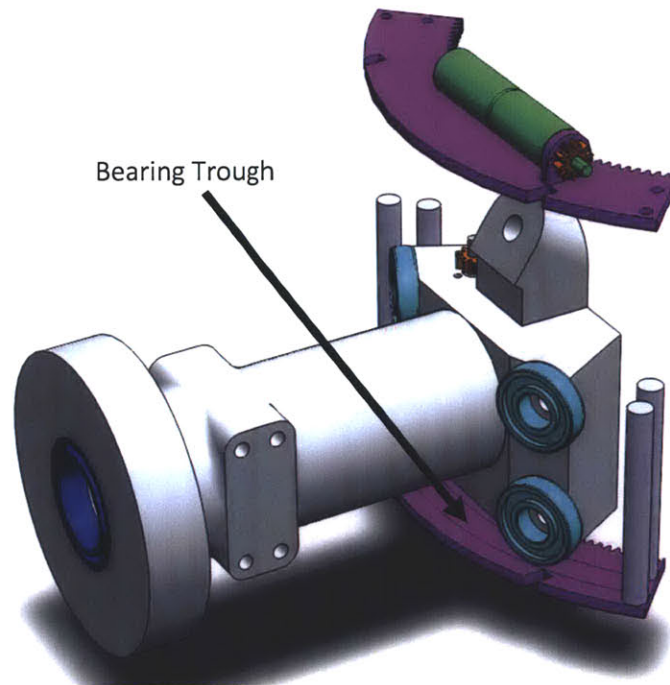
An exploded view of the primary support beam and floating yaw-gear assembly.
